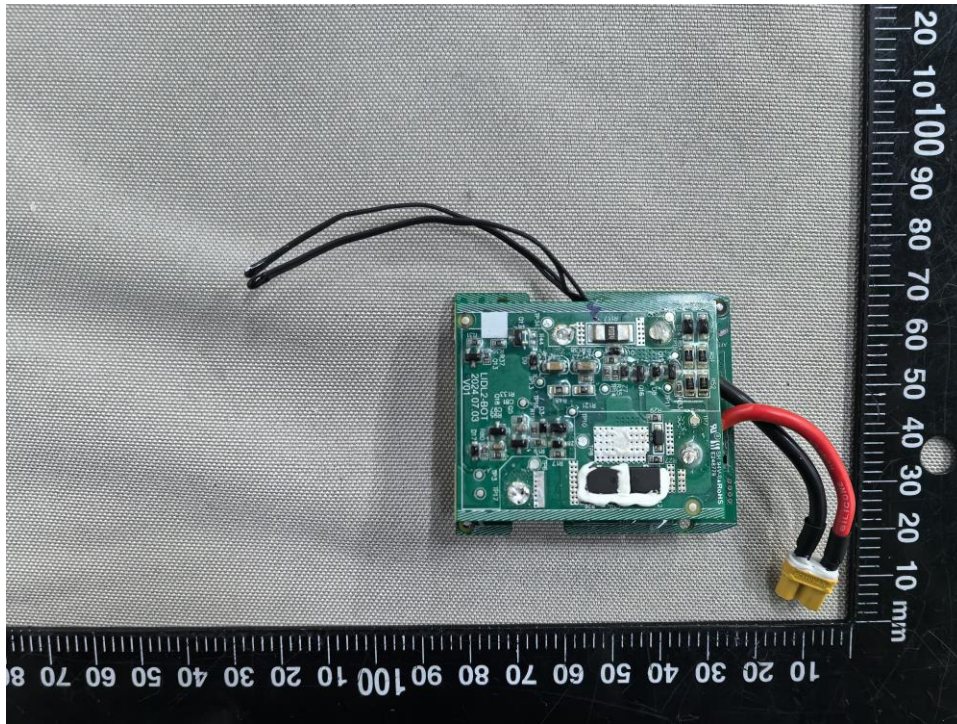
Bottom view of PCBA1(E36100B-ST1)
